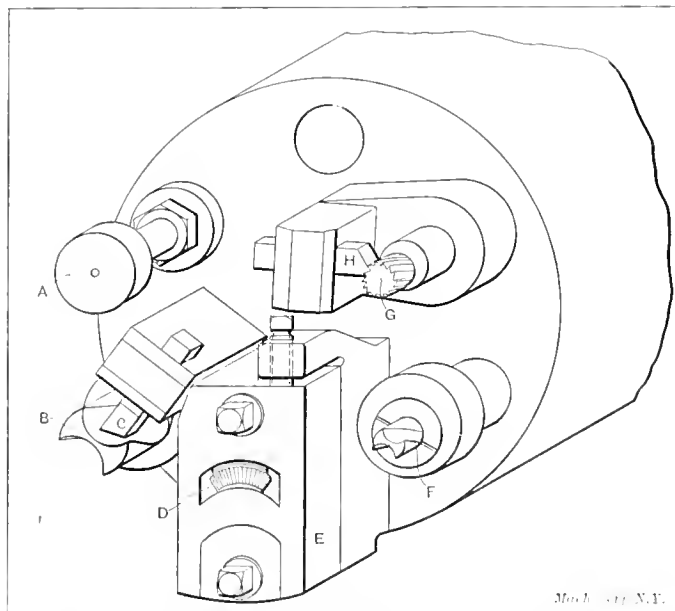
The Arrangement of the Turret Tools for Making the Disks in Fig. 2
